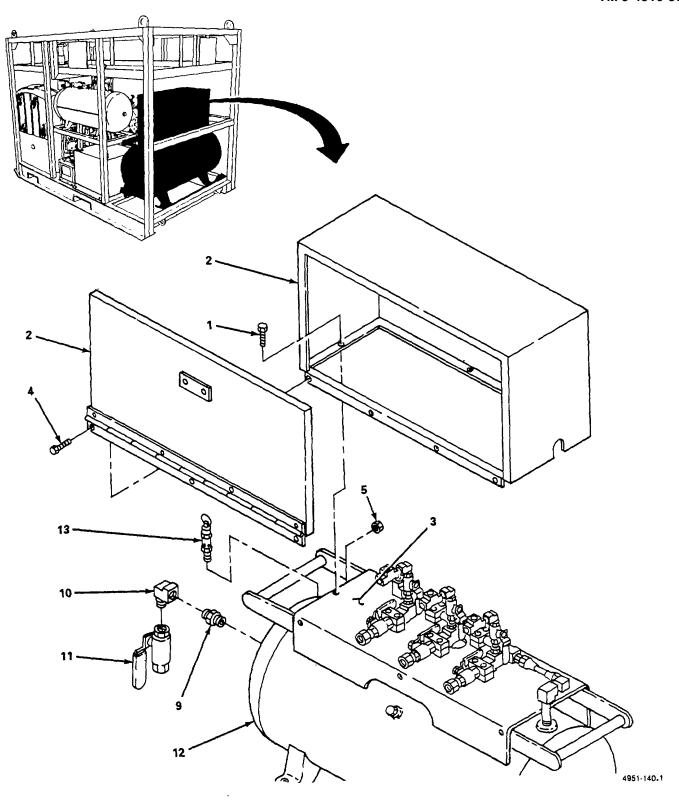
Fittings and Valves, Removal (Sheet 1 of 2).
